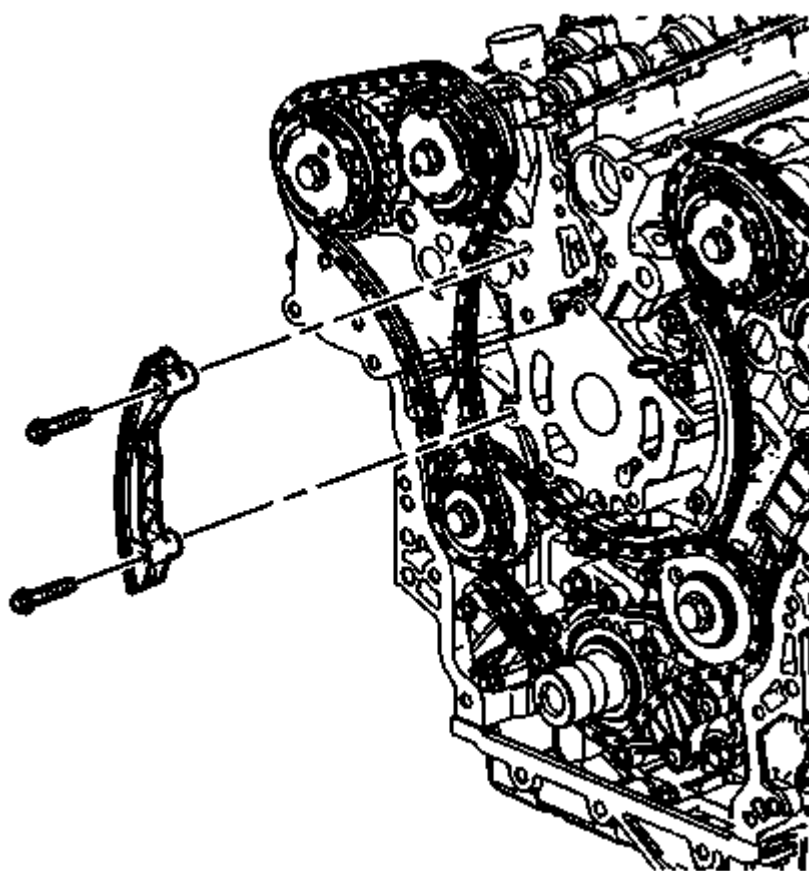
View Of Right Secondary Camshaft Drive Chain Guide & Bolts
